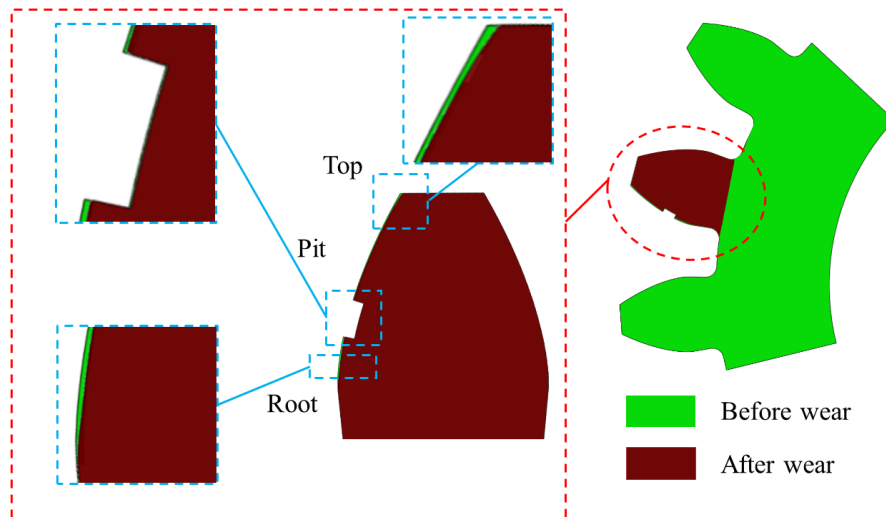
Tooth profile change due to surface wear of pitting gear.
